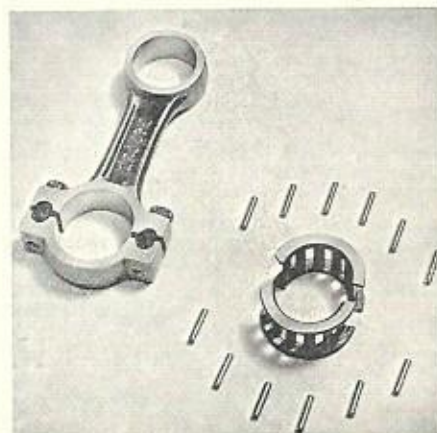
Connecting rod and crankpin bearing. Note notched corners on bearing cage flanges.
